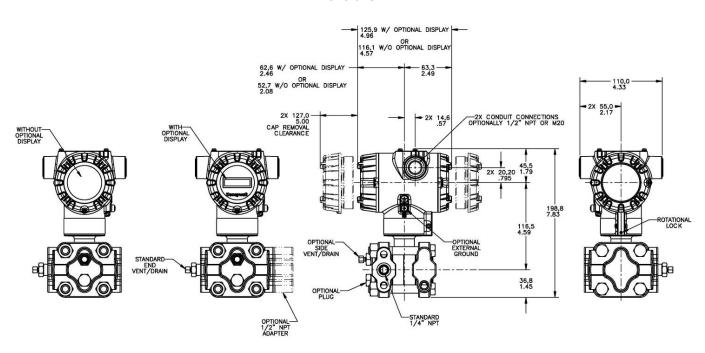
Typical mounting dimensions of STD810, STD820, STD830 & STD870 for reference
